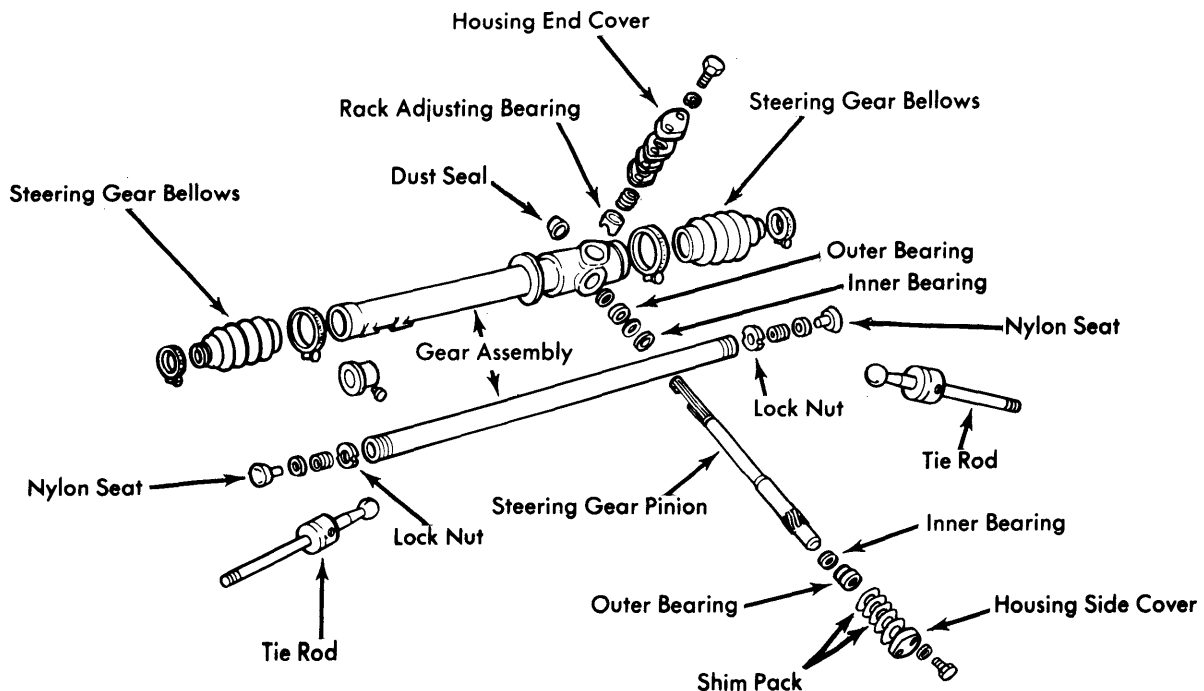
Exploded View of Capri Rack & Pinion Steering Gear Assembly
